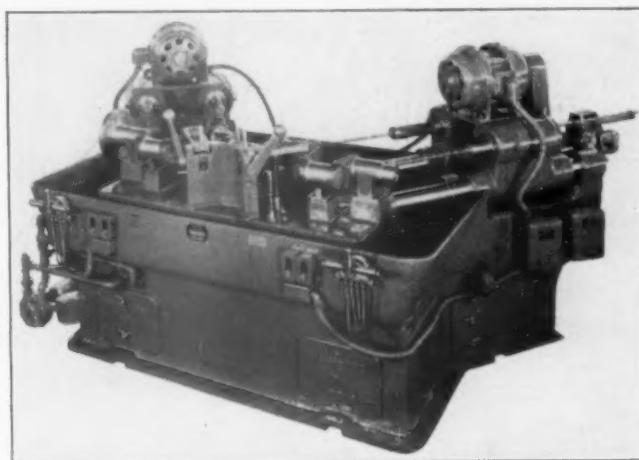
Application of hydraulic step drilling to special crankshaft machine.
